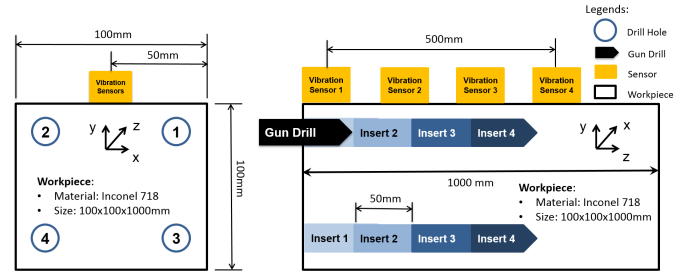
Illustration of the front (on the left) and side (on the right) views of the workpiece and sensor layouts in gun drilling experiment. Note that the z axis is the same with gun drilling direction.
